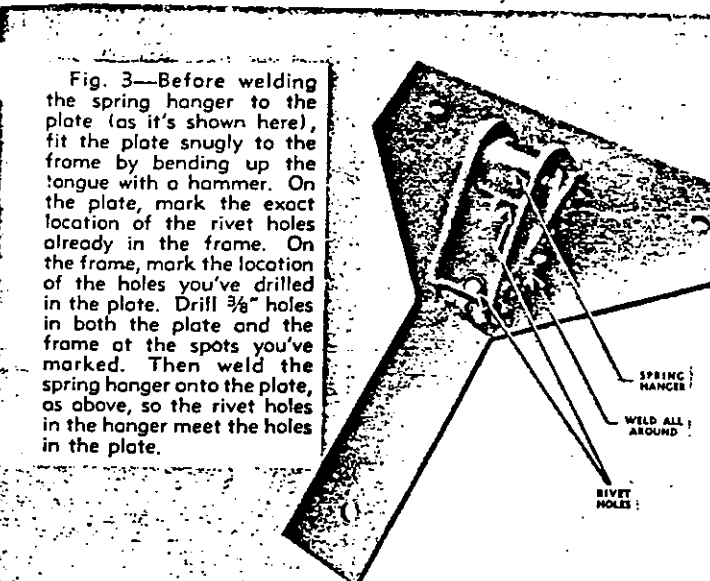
Before welding the spring hanger to the plate (as it's shown here), fit the plate snugly to the frame by bending up the tongue with a hammer. On the plate, mark the exact location of the rivet holes already in the frame. On the frame, mark the location of the holes you've drilled in the plate. Drill $\frac{3}{8}$ " holes in both the plate and the frame at the spots you've marked. Then weld the spring hanger onto the plate, as above, so the rivet holes in the hanger meet the holes in the plate.
